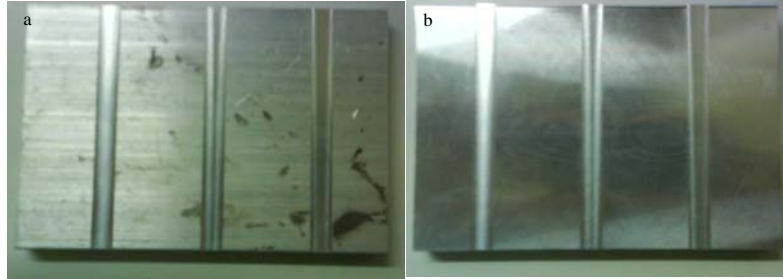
(a) Machined surface for experiment No. 1 and (b) machined surface for experiment No. 2
